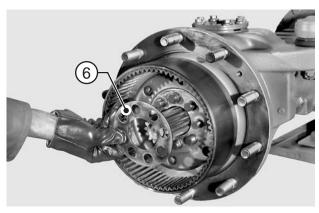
Ensure that faces are thoroughly cleaned, and then mount the safety flange (6).
